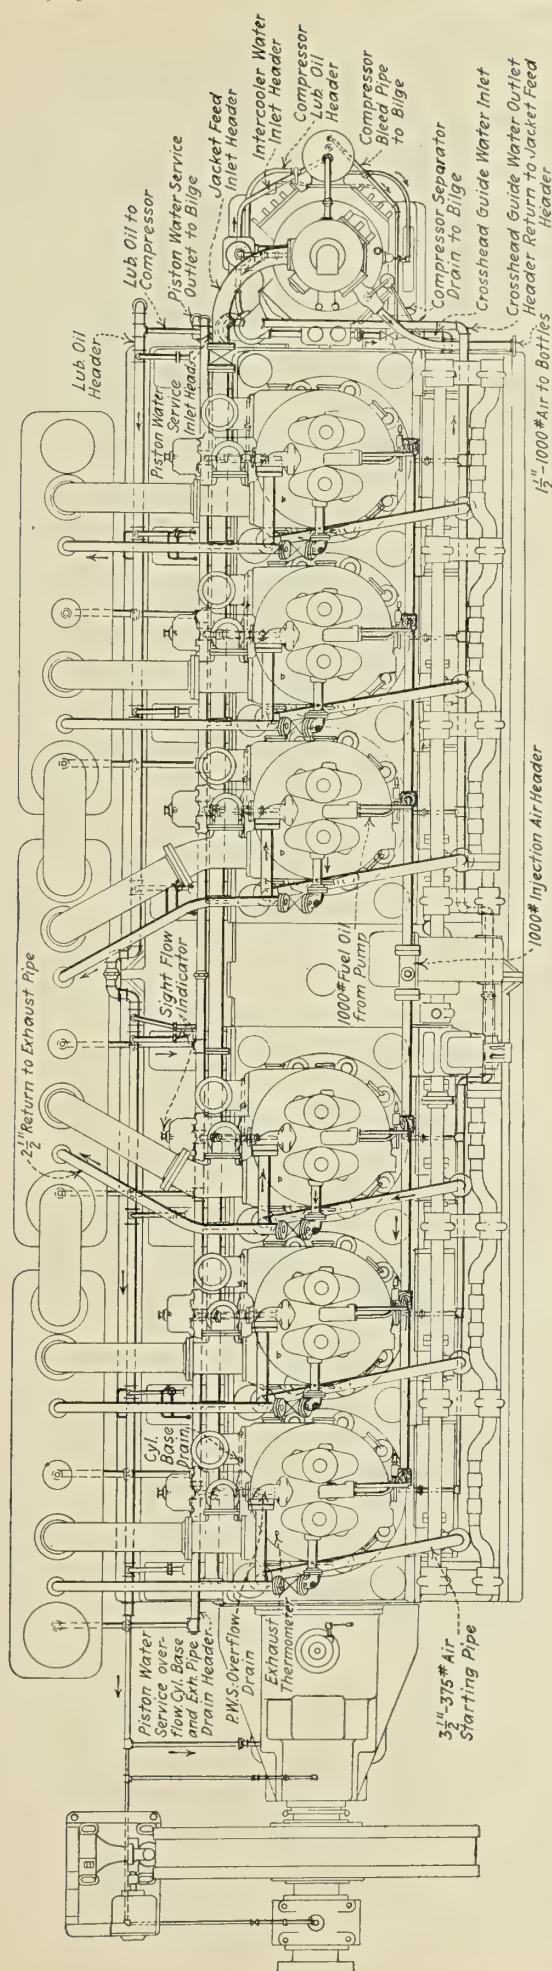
Top of Engine, Showing Arrangement of Piping
